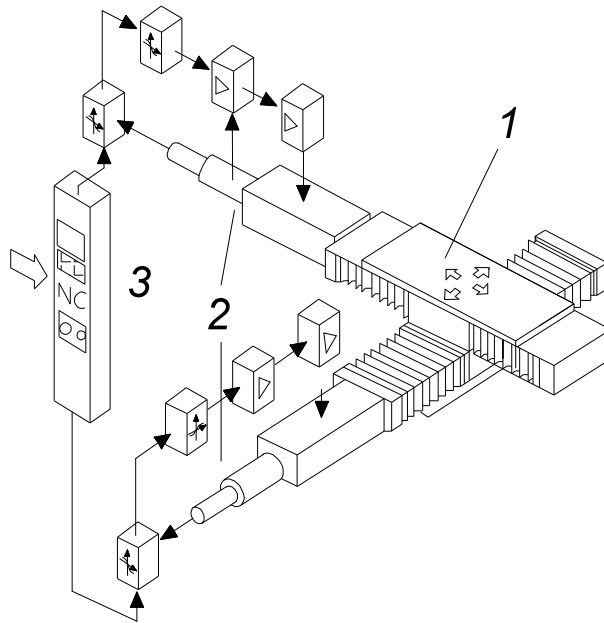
NC axes of a cross-table: 1 – cross-table, 2 – NC axes, 3 – machine tool control unit
